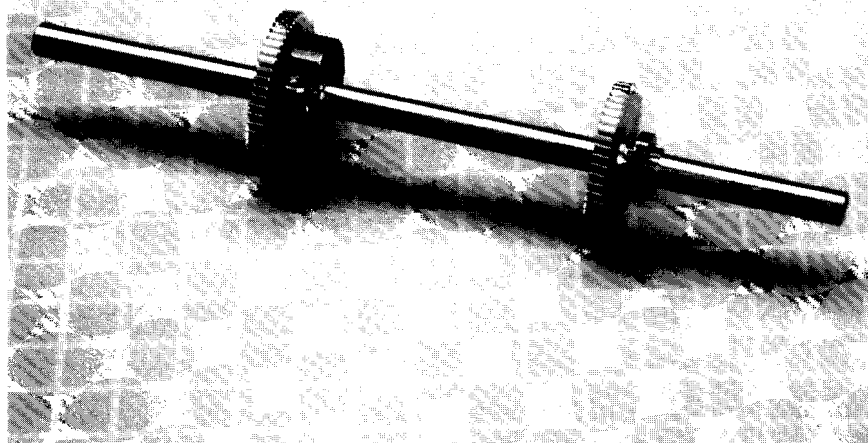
A Tinel ring and a mechanical clamp of lower strength locating gears on a shaft
